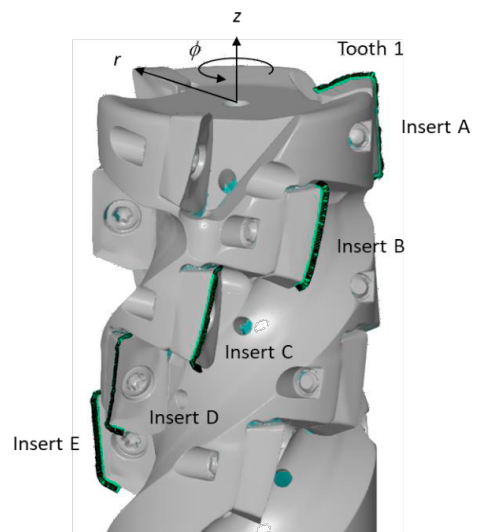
Scan and edge coordinates for one tooth on the indexable, square shoulder, helical end mill (31.8 mm shank and cut diameters, three teeth, 15 inserts total).
